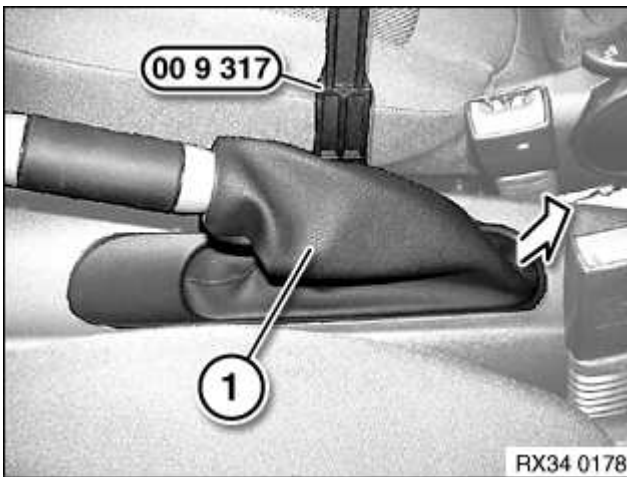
Identifying Boot And Special Tool (00 9 317)
